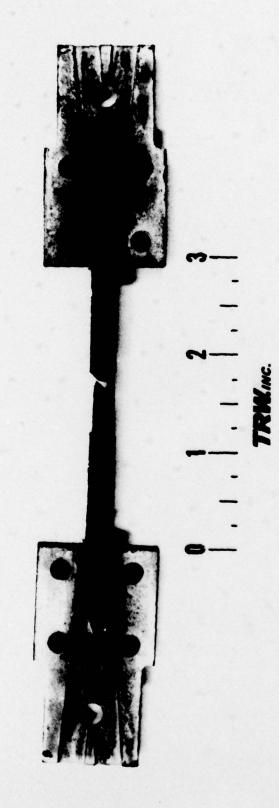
Exploded View of Grip/Specimen Assembly After 1800F Test.
